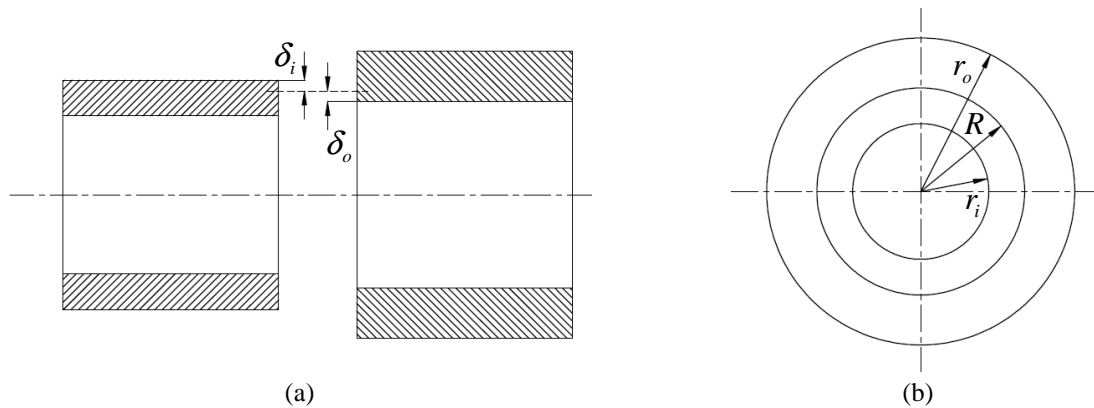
Assembly of two hollow cylinders by interference. (a) lateral sectioned view in the disassembled situation and (b) top view after assembly.
